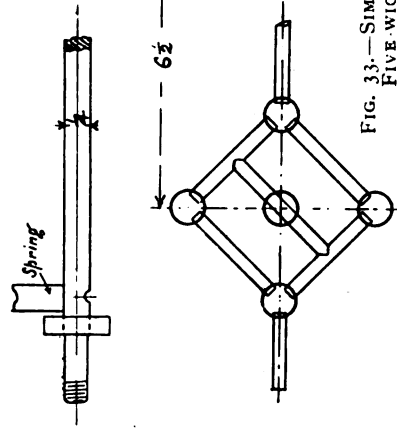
SIMPLE DESIGN FOR FIVE-WICK BURNER.
